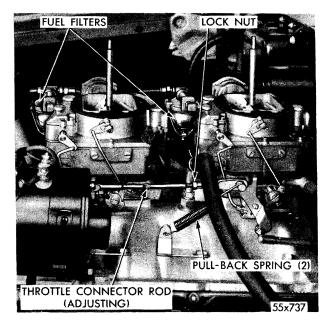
Air Cleaner and Silencer Removed (Carburetors Installed)
